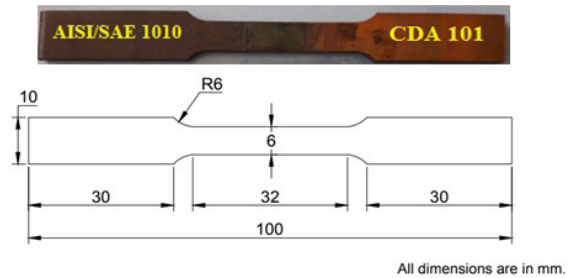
Dimensions [ASTM E8-04] of the tensile sample.
